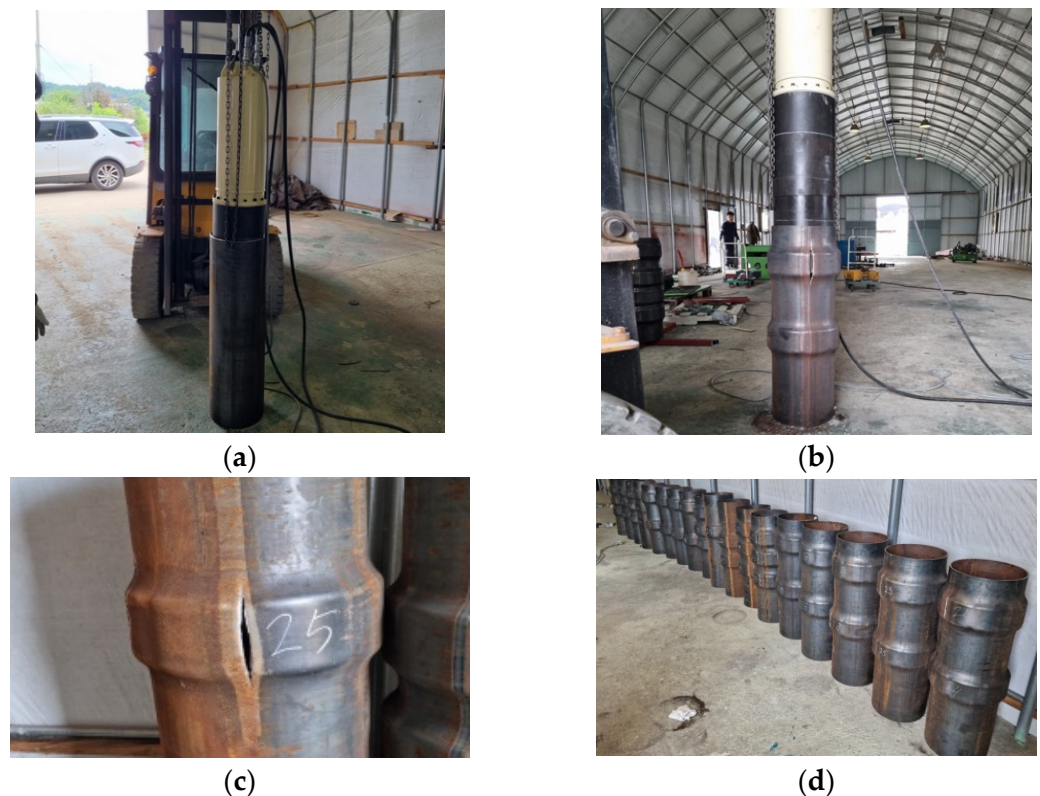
Test bed experiment for expansion ability of full-scale hydraulic expansion equipment: (a) Preparation of steel pipe and full-scale hydraulic expansion equipment; (b) Expansion of steel pipe; (c) Fracture of steel pipe during experiment; (d) Steel pipes after experiment.
